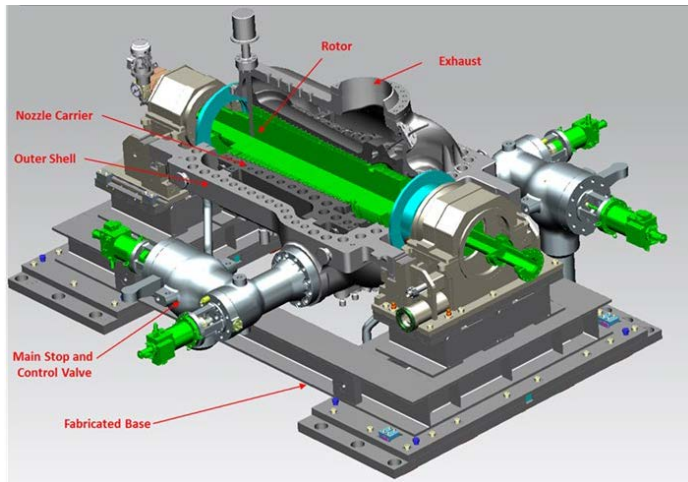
A-USC Steam Turbine - Showing Nozzle Carrier (courtesy of GE)
